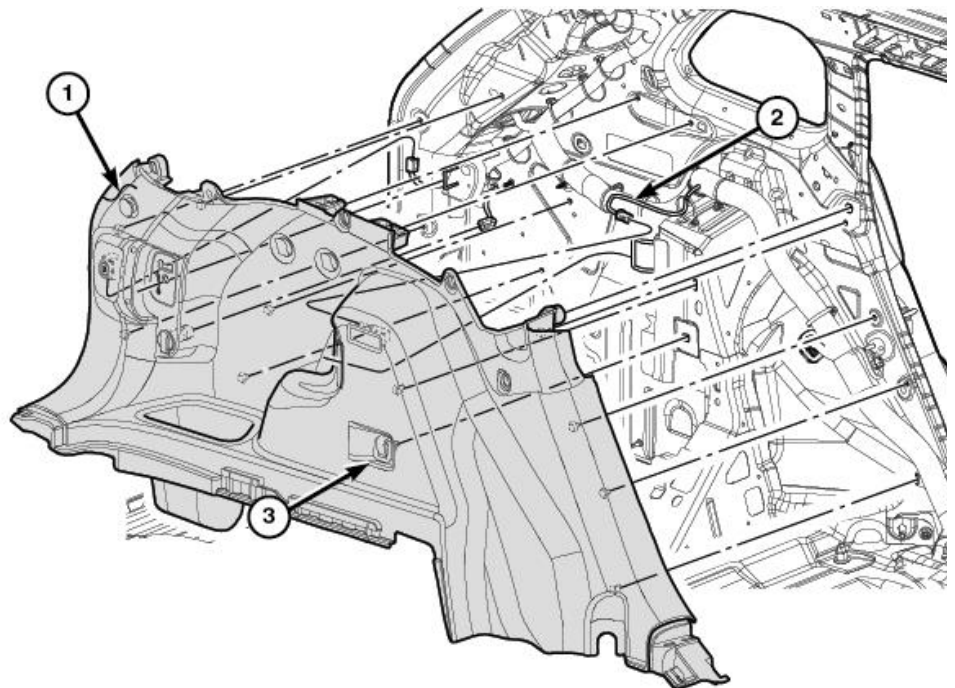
Lower Quarter Trim Panel (Passenger Side Shown, Driver Side Similar)
